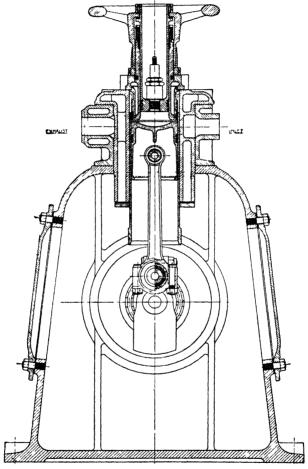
Cross-sectional arrangement of single sleeve-valve research unit, type E5/1
